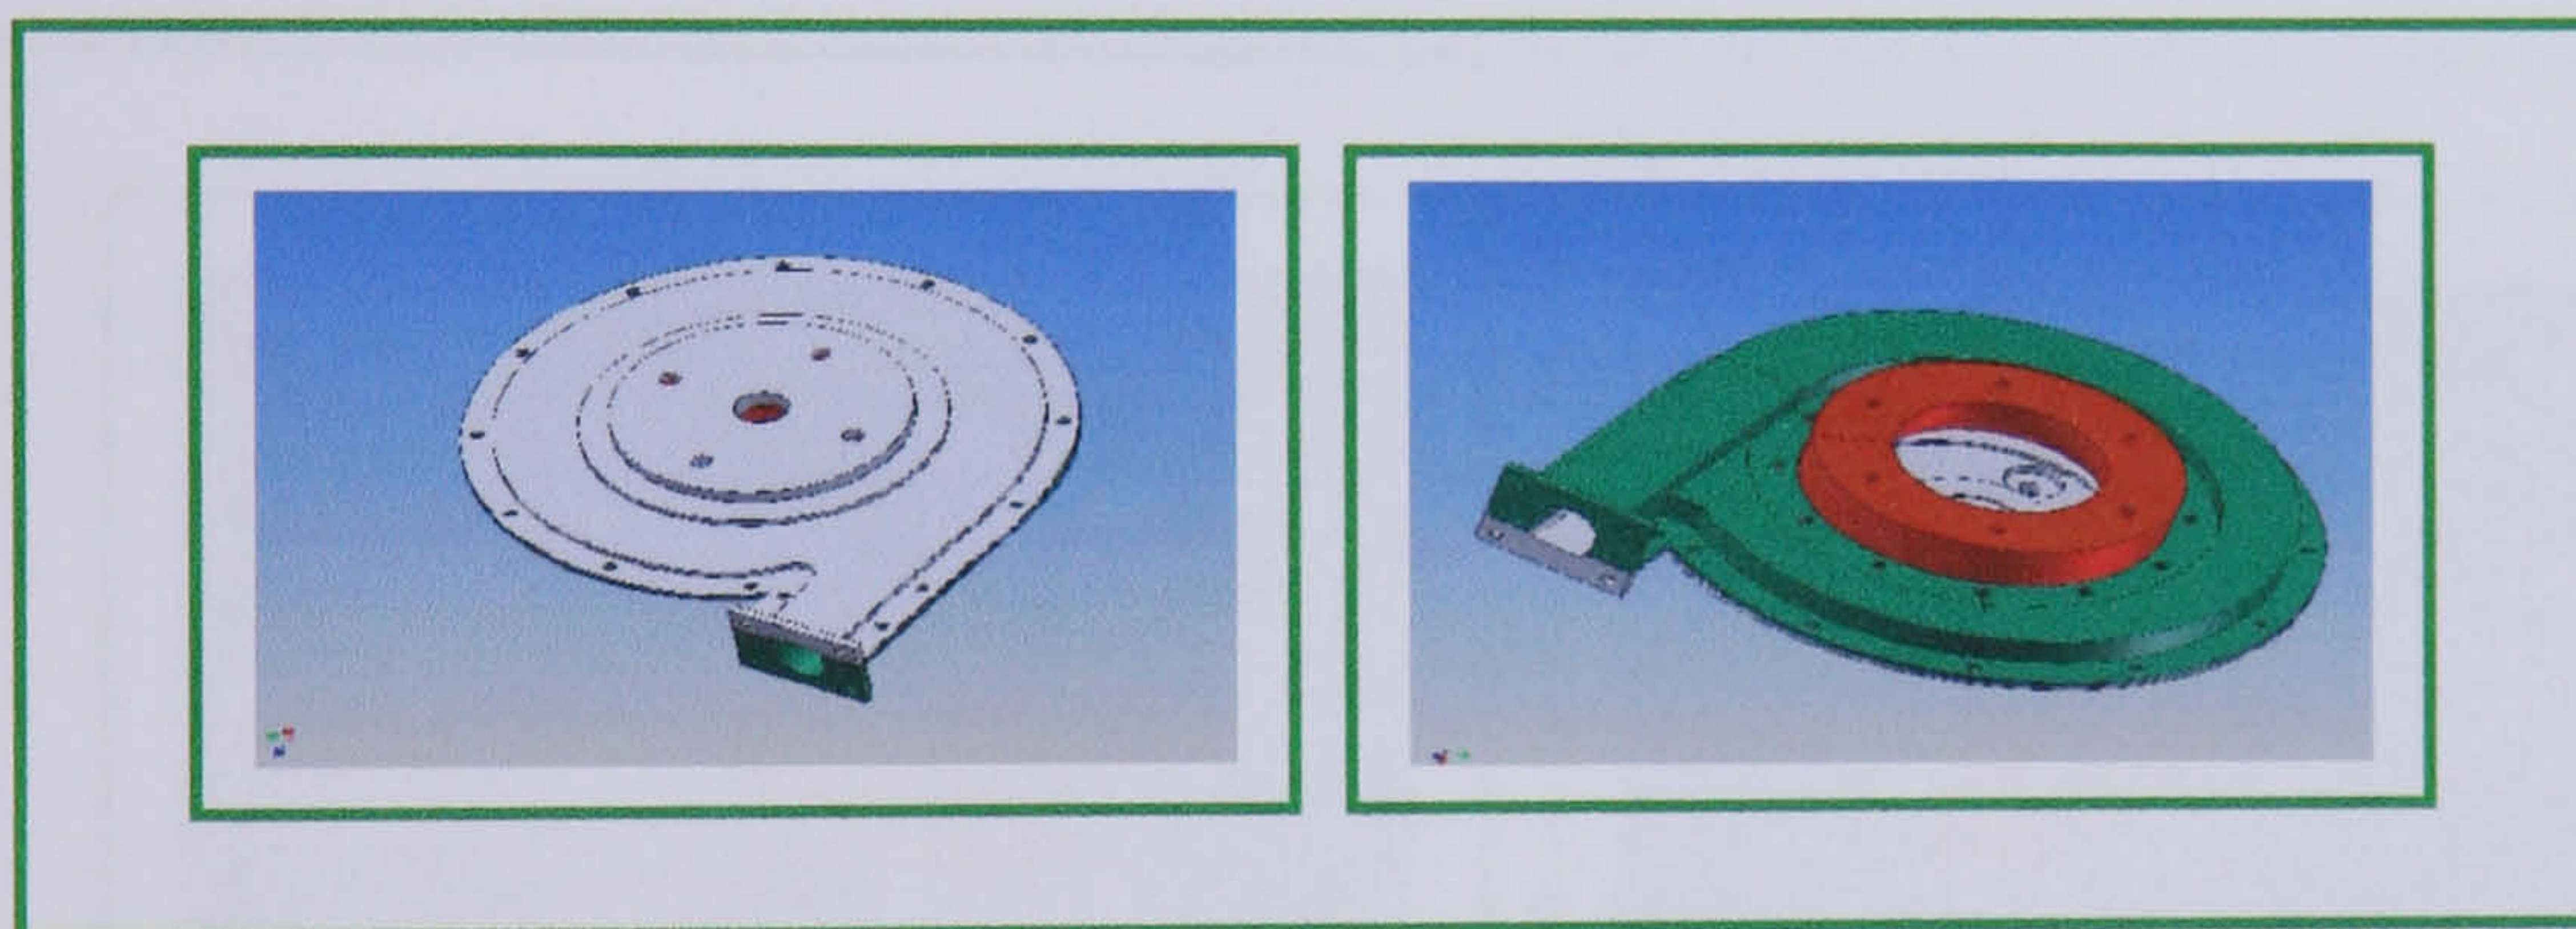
SOLID MODEL OF THE CENTRIFUGAL COMPRESSOR CASING ASSEMBLY
